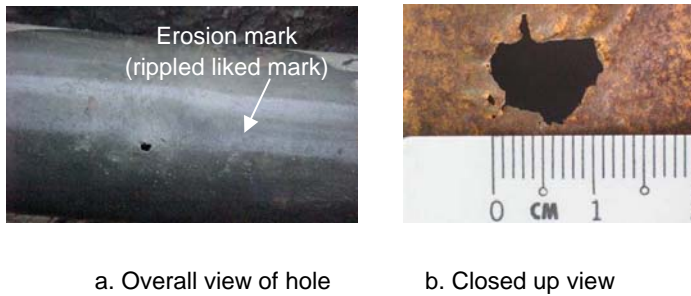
A 10 mm diameter hole on NPS8 gas pipe wall
